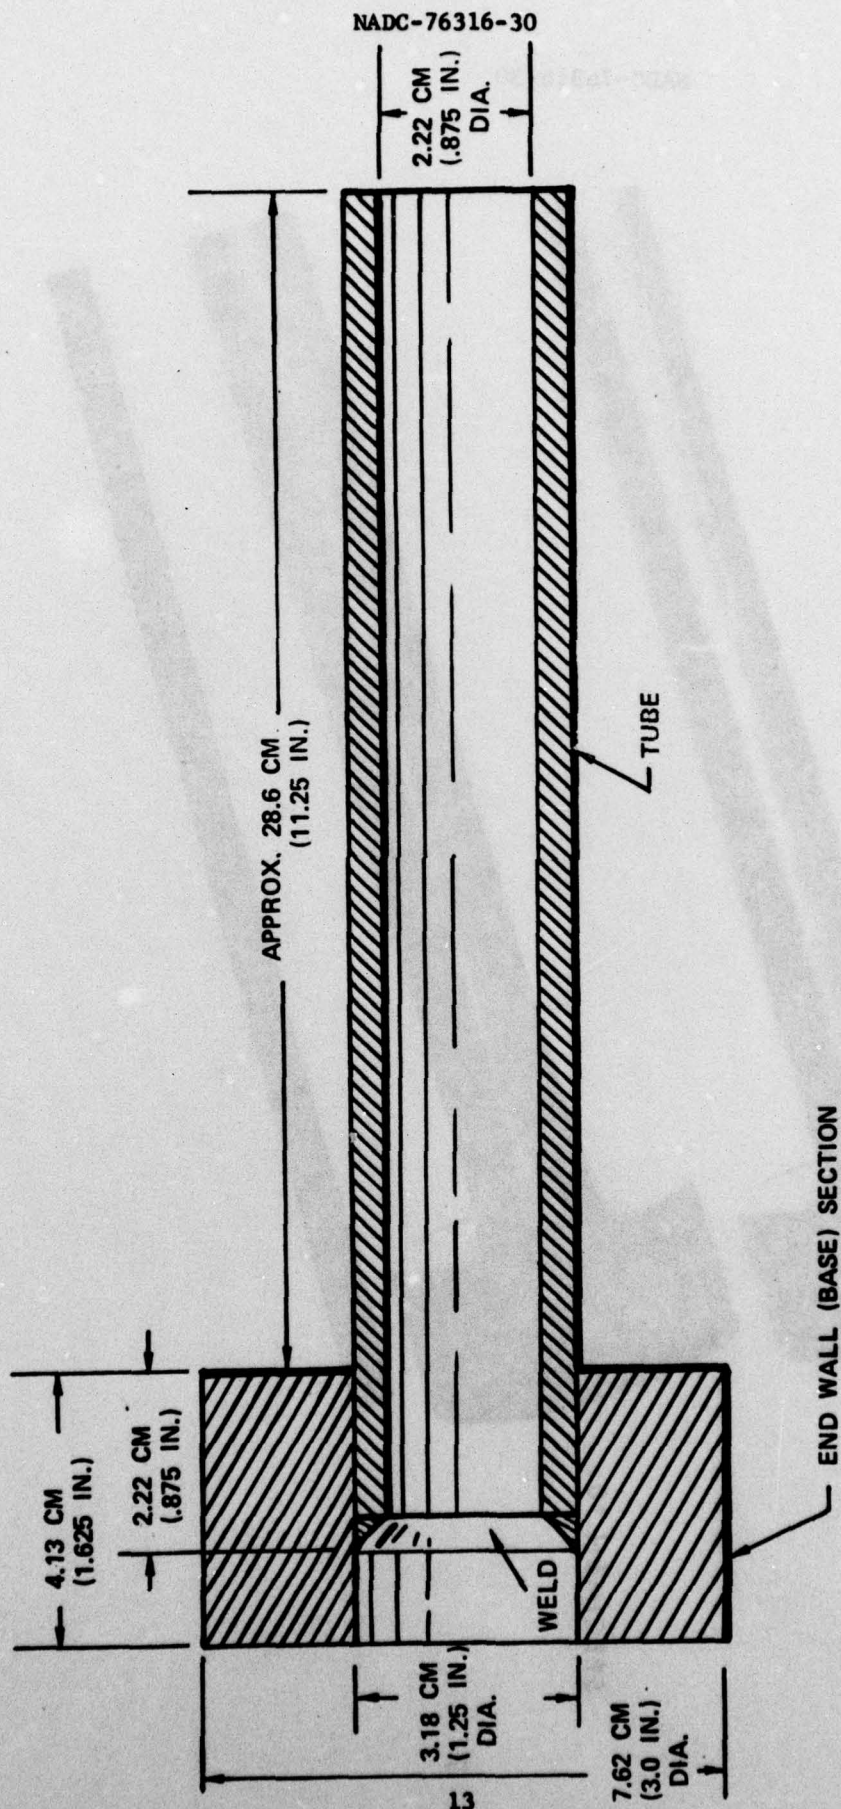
Machine Welded Test Specimen Design (Nominal Dimensions)
